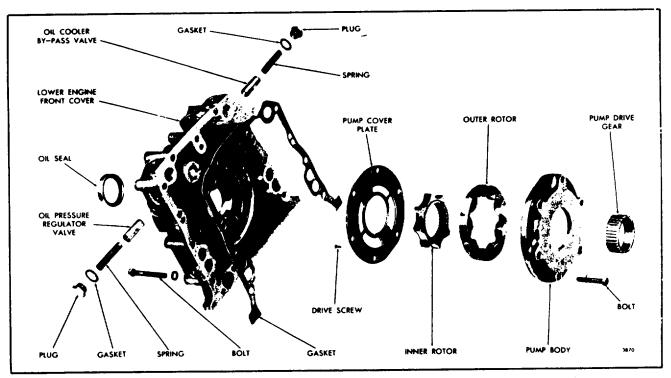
Lubricating Oil Pump Details and Relative Location of Parts (Current)
